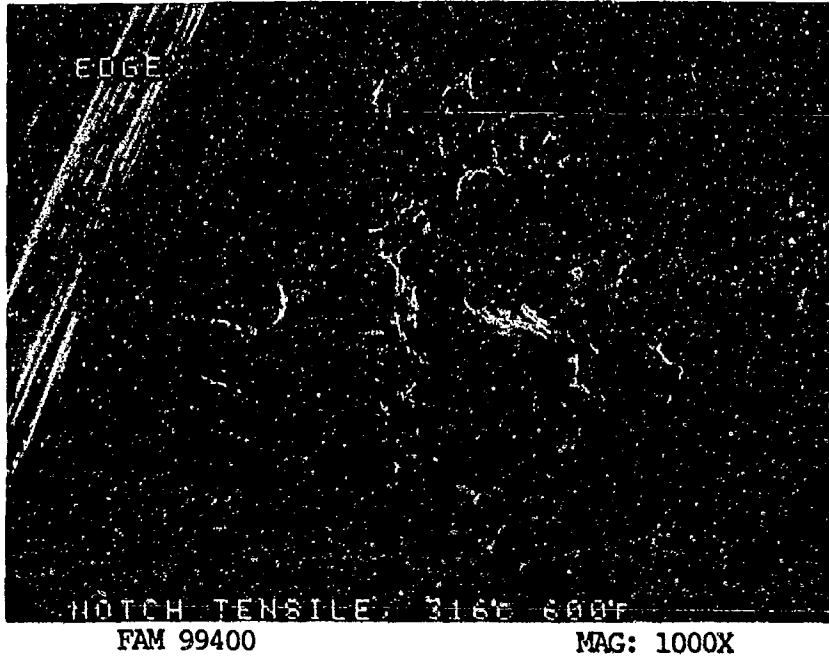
Flatter features and finer dimples near the edge of the specimen fracture surface.
